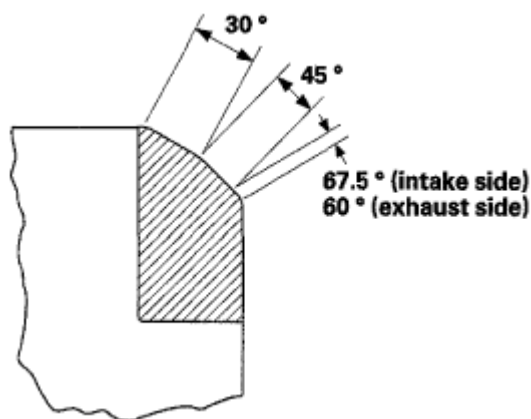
Identifying Valve Upper And Lower Edges Angles
